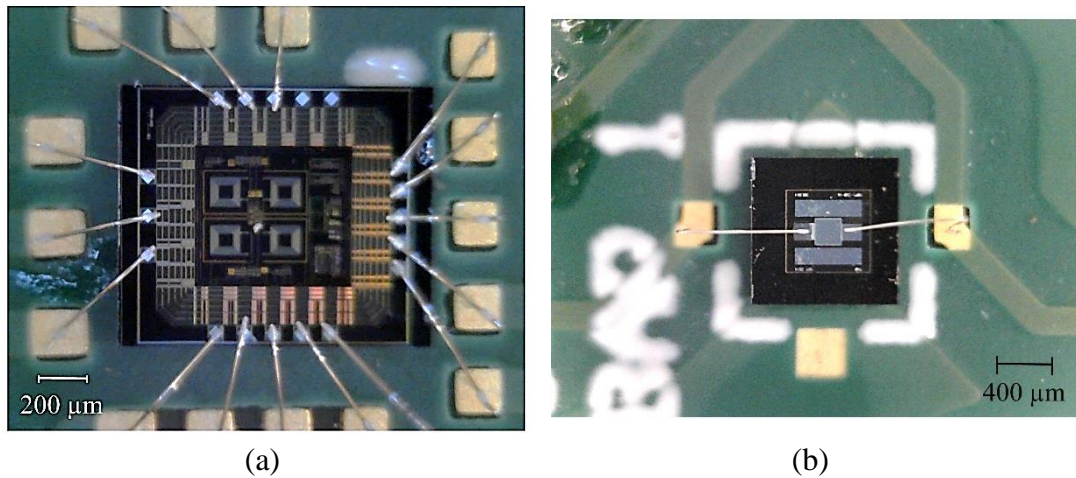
Photograph of (a) the ASIC chip and (b) the SMR wire-bonded to the interface PCB.
